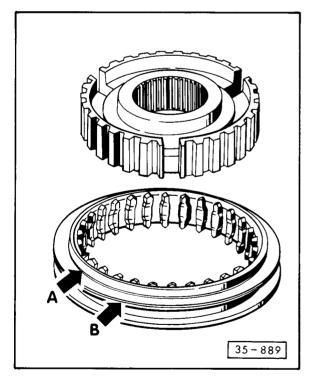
Assembling sleeve and synchronizer hub for 1st and 2nd gears
